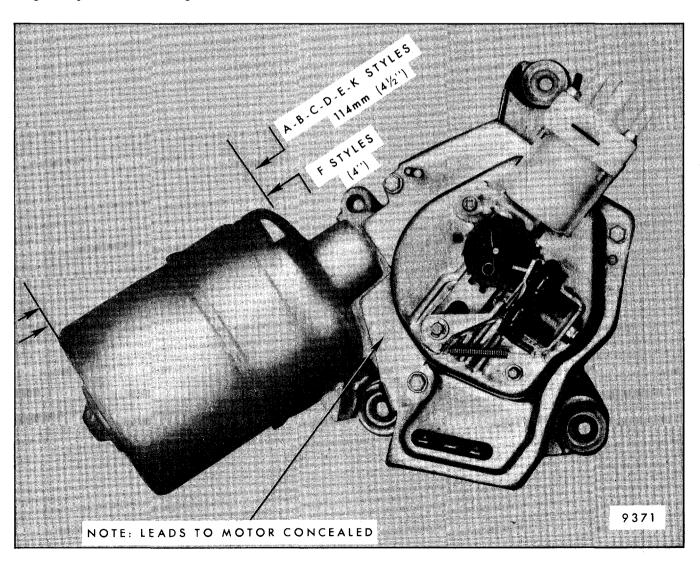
Round Wiper Motor and Pump Assembly (Internal Leads)
